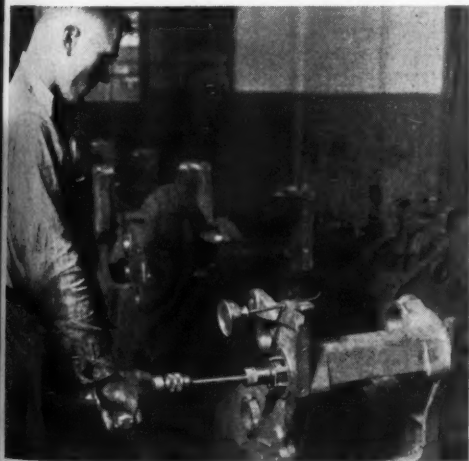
The main bearing holes are finished to size by honing with this Hutto hone.
